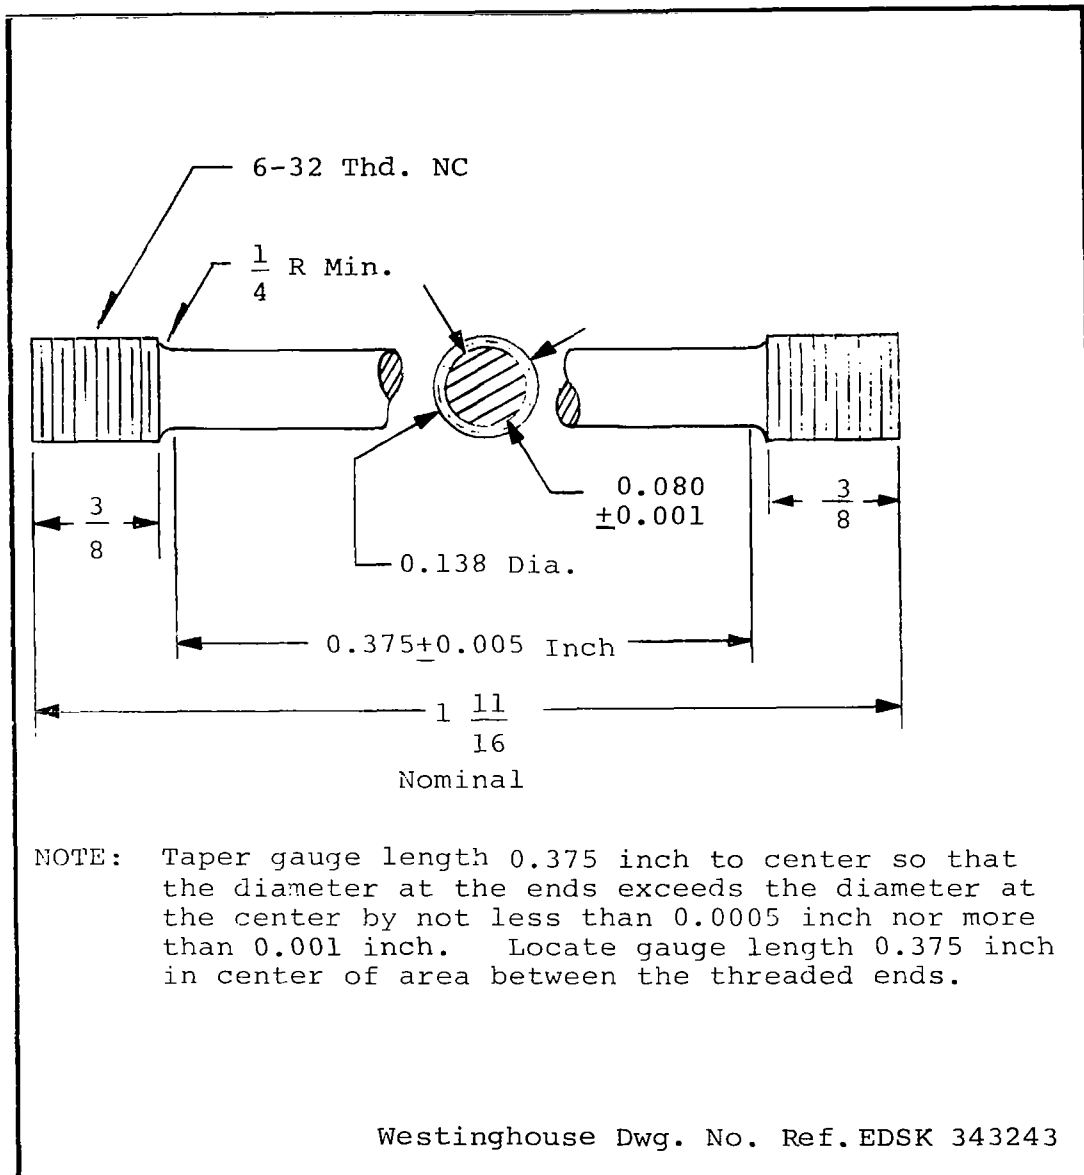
Vacuum Tensile and Creep Specimen for Rod
